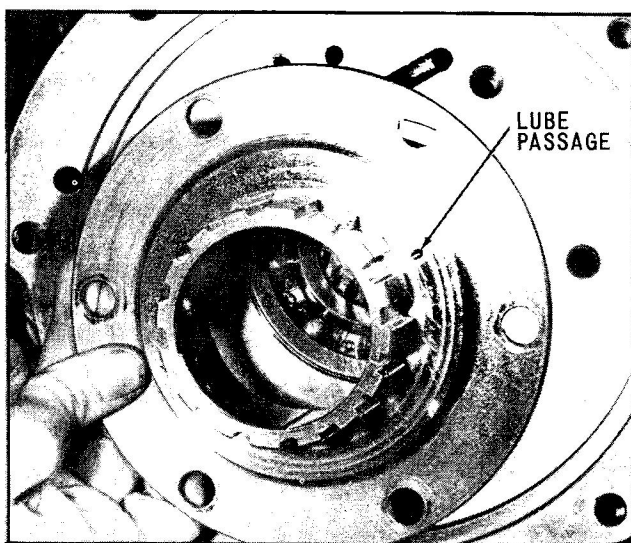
Assemble Bearing Retainer (2 and 3 to 1 Ratio)
